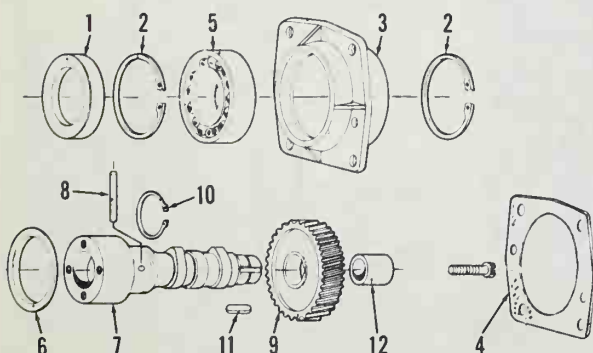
Exploded view of bearing-supported camshaft used on some models.
